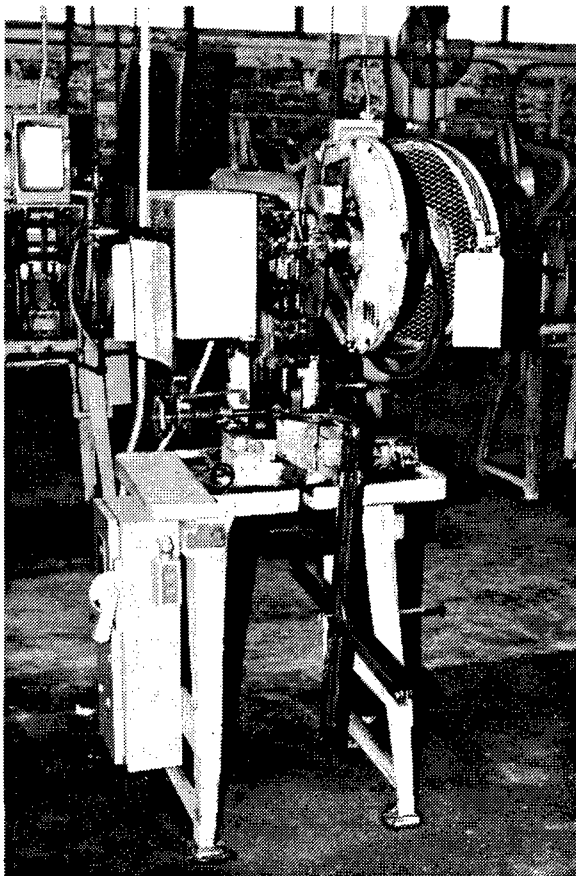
Building 135: A 7.62 mm Primer manufactured by Emhart Manufacturing V&O Division and received at the plant in 1956.
